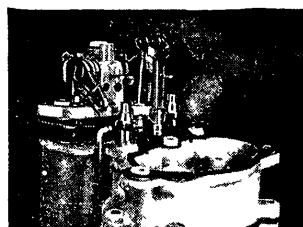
Disconnect throttle connector rod at upper end and remove bowl cover with vacuum piston and link, and all attached parts. Remove bowl cover gasket and vacuum piston spring
